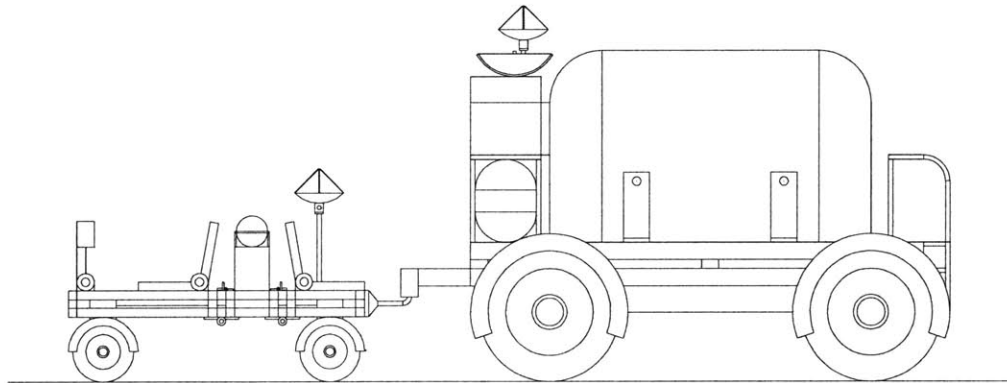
Surface Exploration Vehicle - UPV/Camper Assembly
